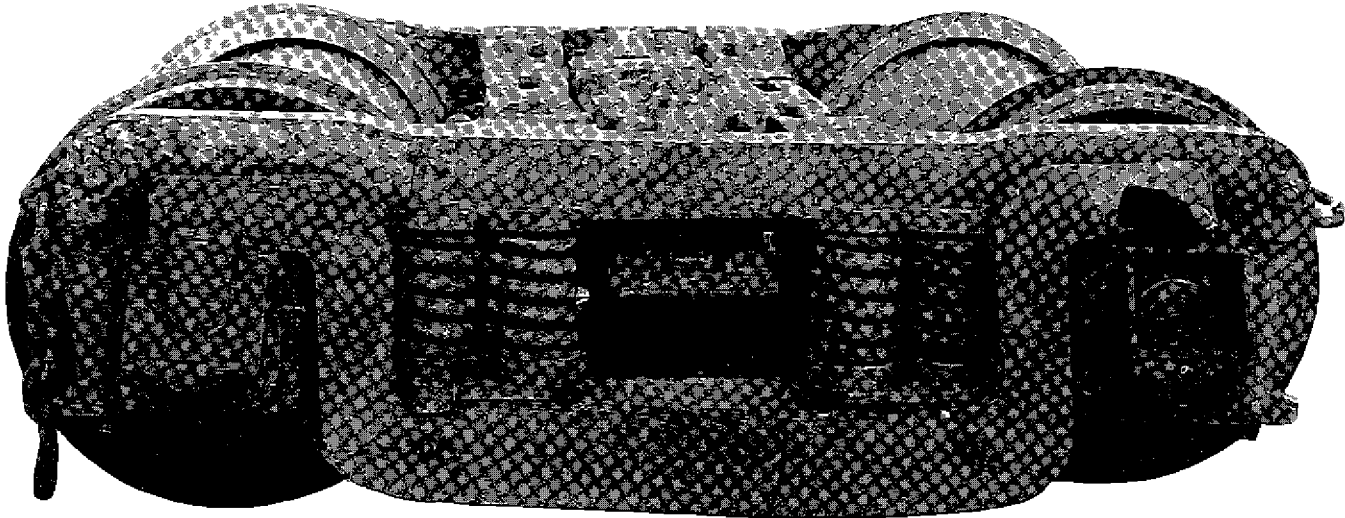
Rear tender truck in the condition recovered after the derailment. Crack in side rail at rear of seats of helical springs.
